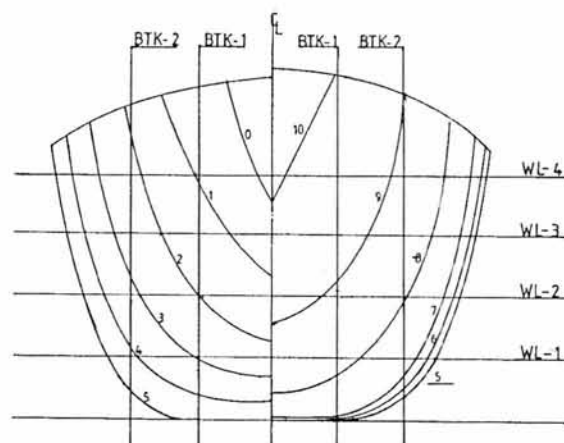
Body plan of typical country boat (22x4.75x2.75 ft)
